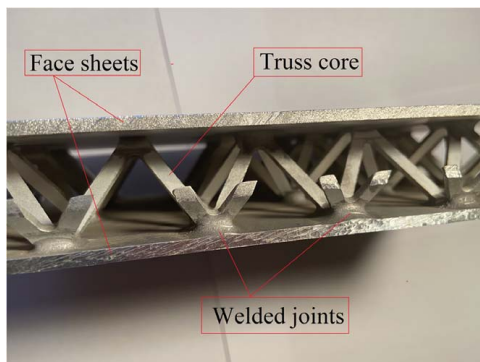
Components of the PTSP studied in this work with welded joints made by the welding process
